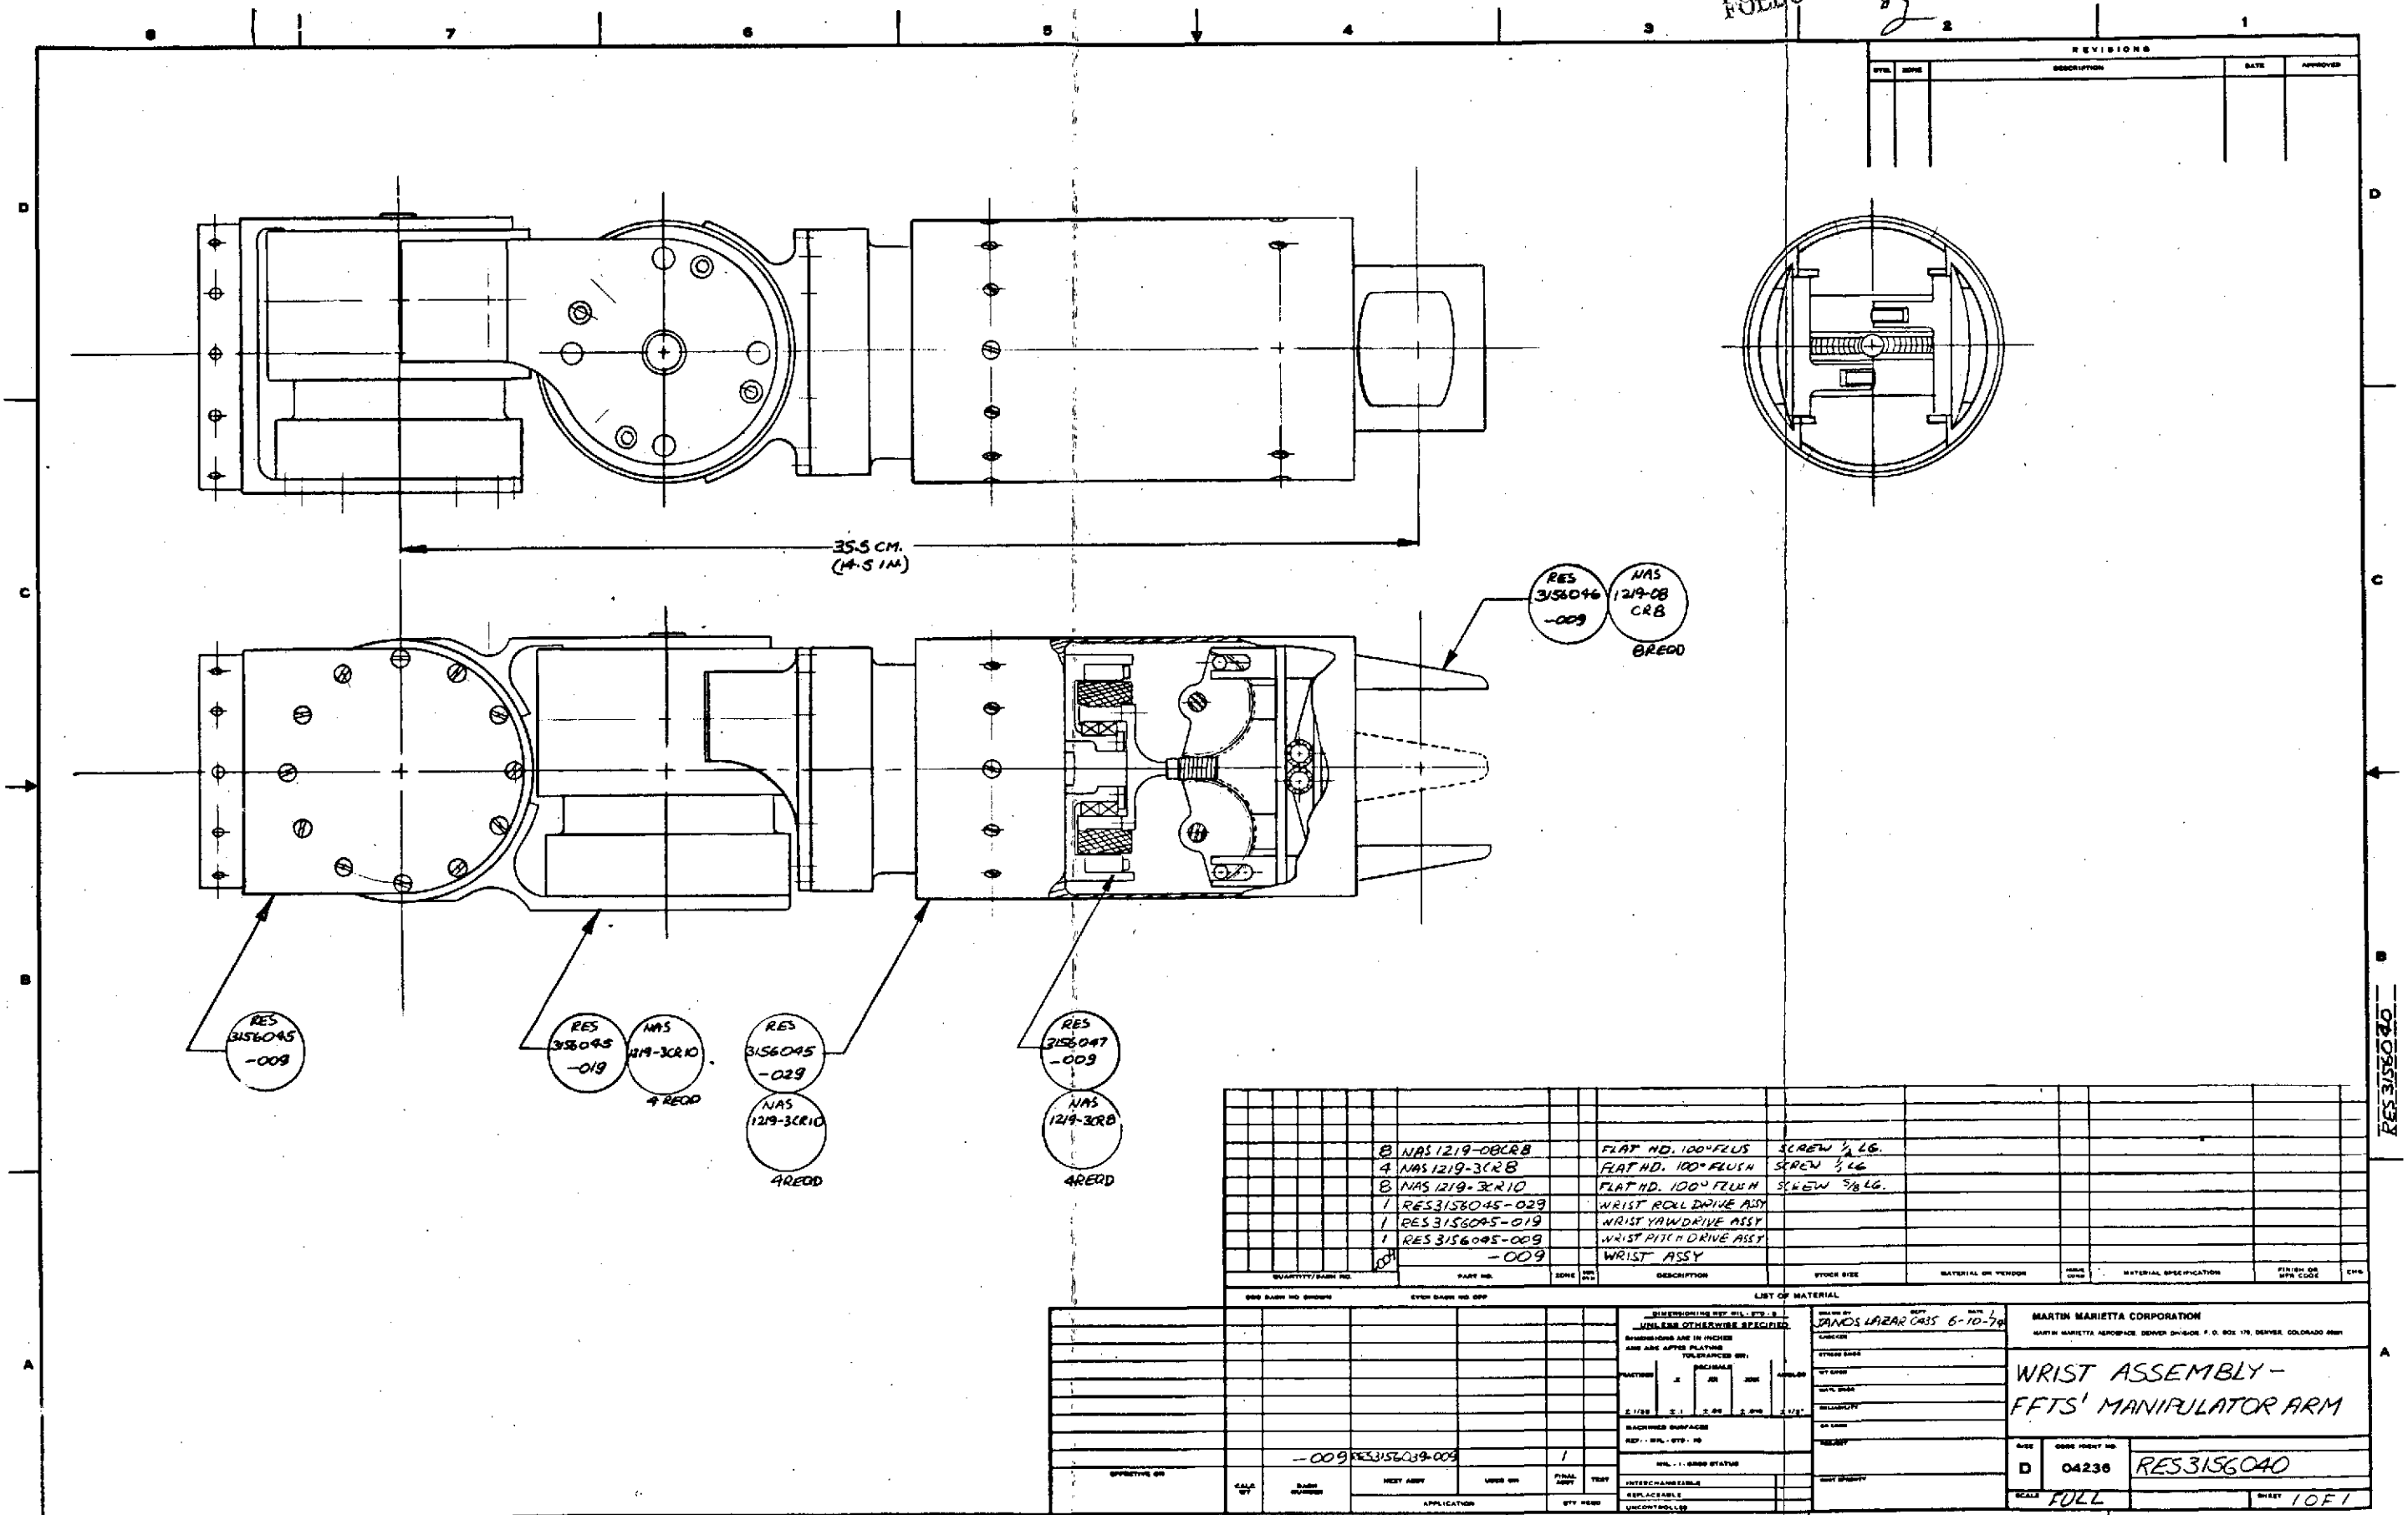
Final Assembly Drawing of FFTS Manipulator Arm
